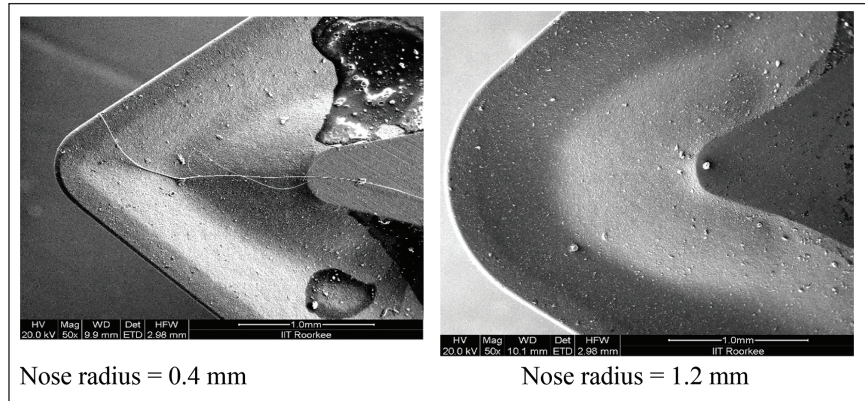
Tungsten Carbide Inserts Used in Experiments Before Machining.
